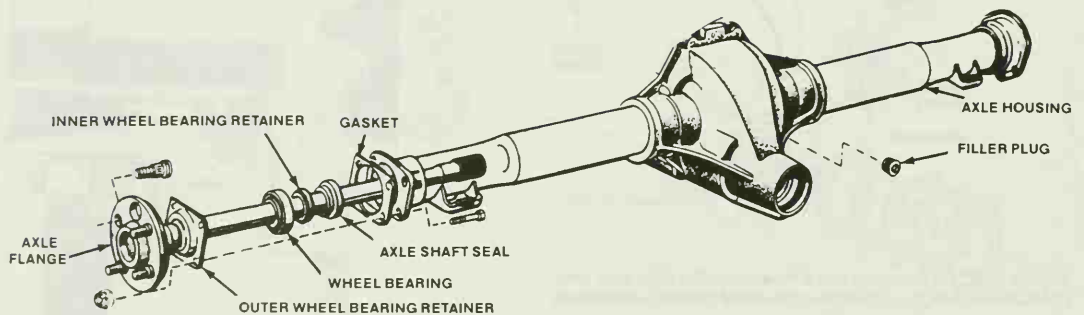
The axle bearing is held in place by an inner and outer retainer. (Chevrolet Motor Division of General Motors Corporation)
